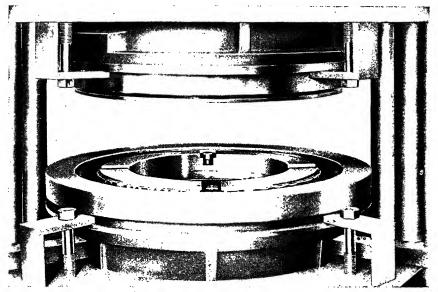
Single-cavity, built-up, positive mold for automobile steering wheel. A core-covering problem in which the core is a metal rim (integral with the spider) which is to be covered with a layer of plastic. Same work might be done in injection mold—depending upon type of plastic used.
